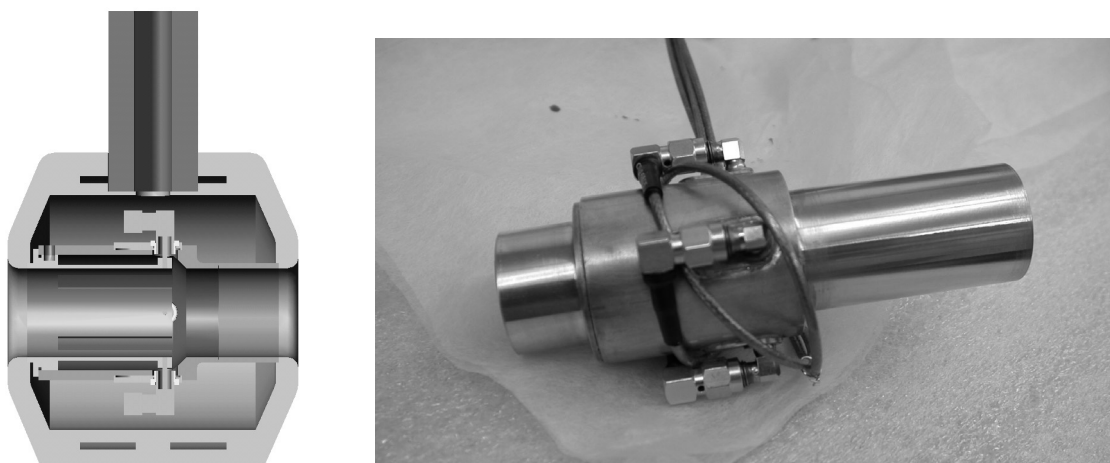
Left: cross section of a DTL BPM inside a drift tube. Right: photograph of a DTL BPM.
